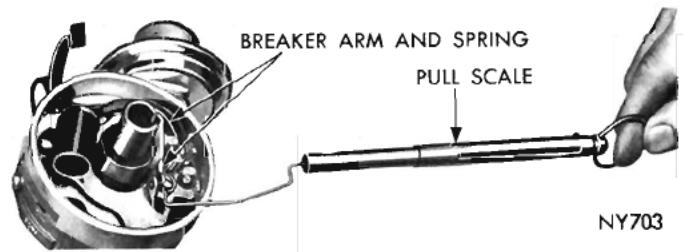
Testing Breaker Arm Spring Tension (Typical)
